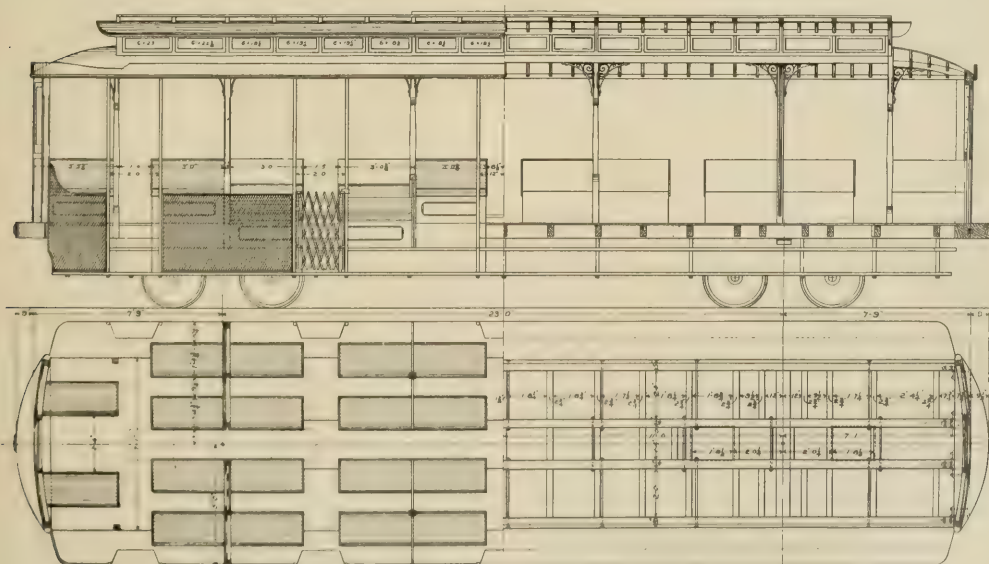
PLAN AND SIDE ELEVATION OF OBSERVATION CAR.
